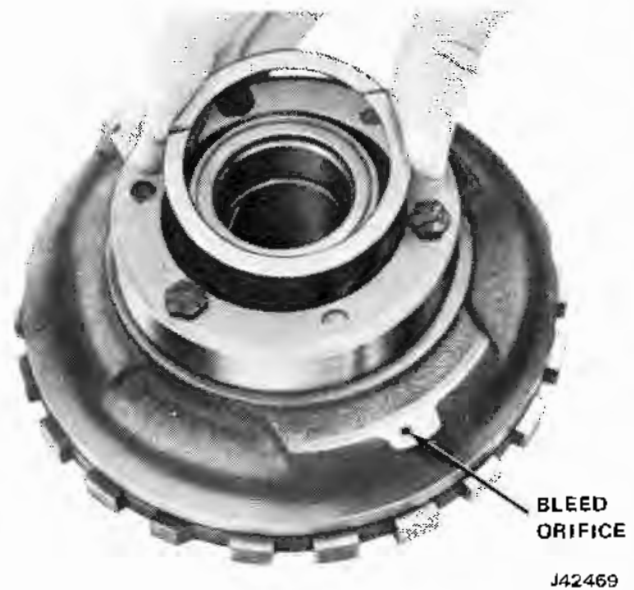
Removing-Installing Center Support Thrust Washer
